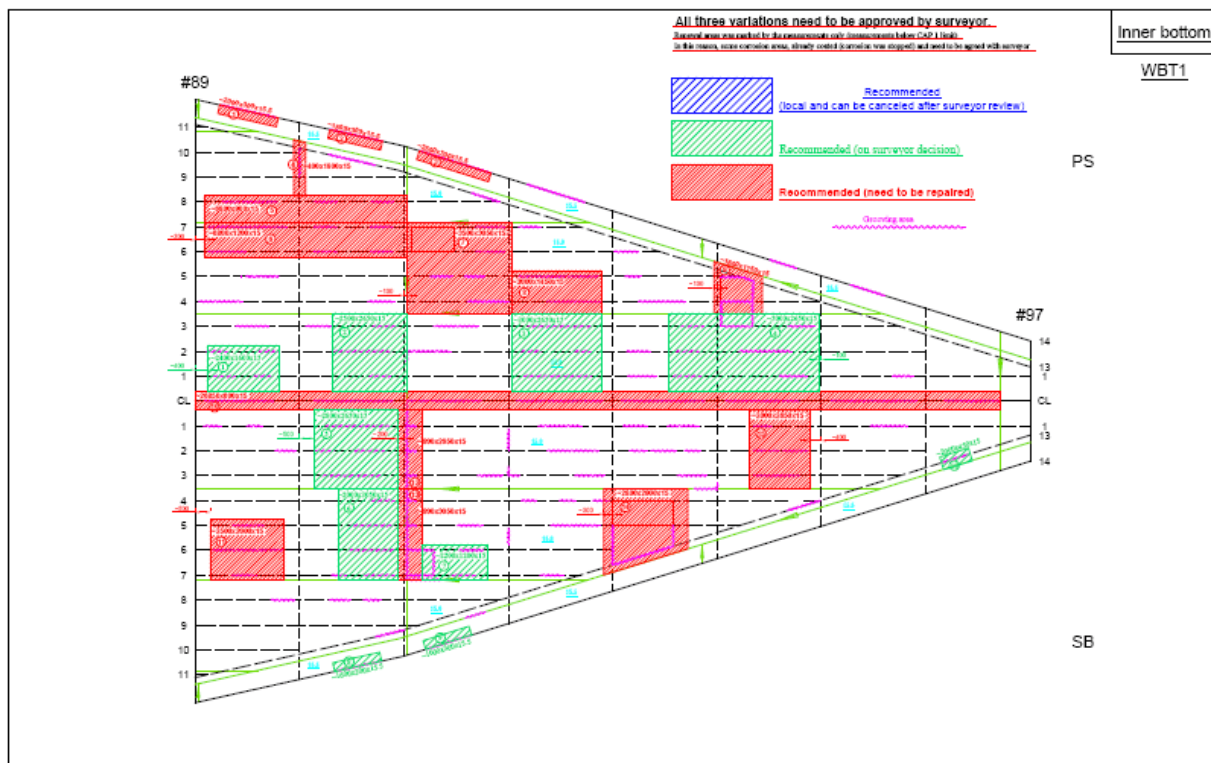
Deck UTM Report and Steel Renewal Sketch
